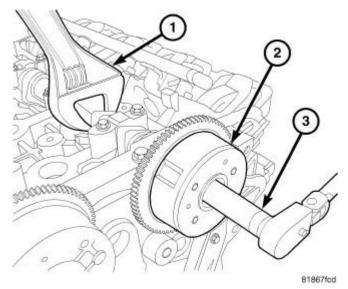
Removing & Installing Camshaft Phaser Courtesy of CHRYSLER GROUP, LLC
